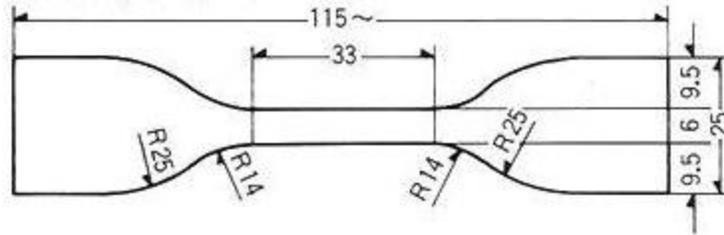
Die C (ASTM D412) tensile dumbbell specimen (dimensions are in mm)
